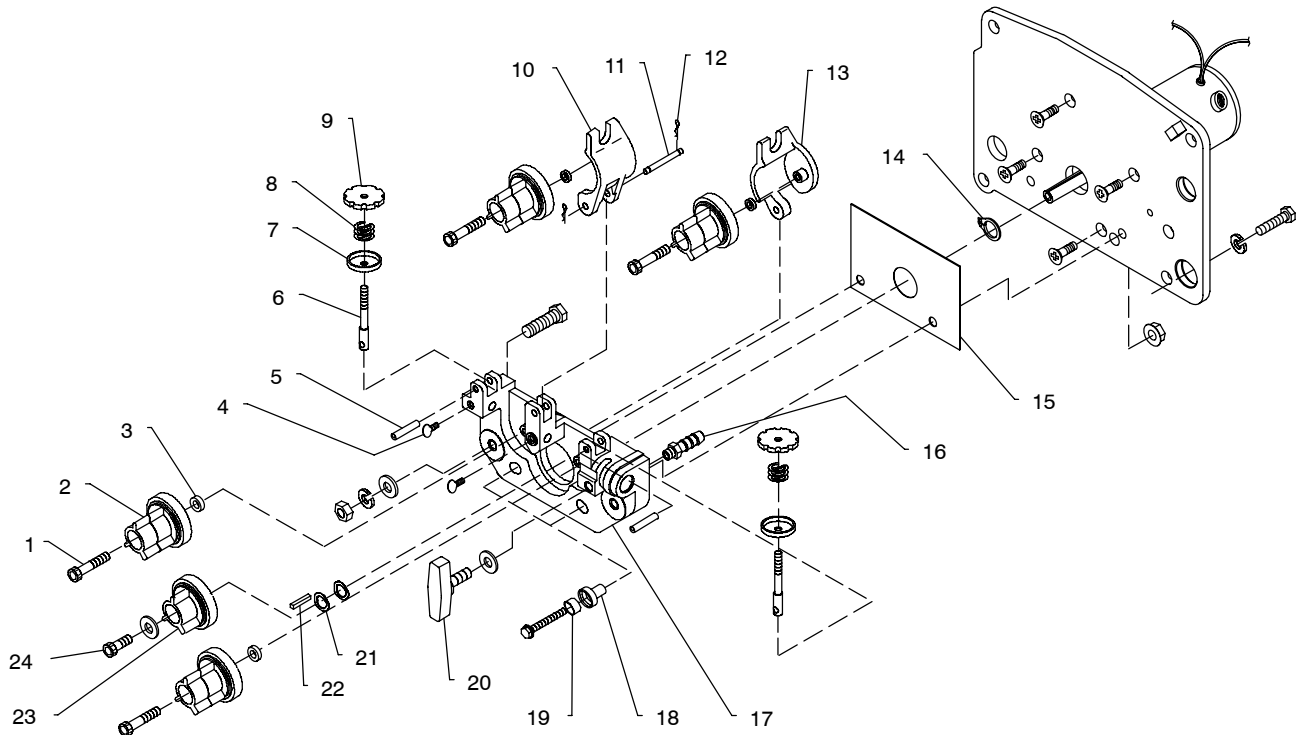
Drive Assembly, Wire (2 Drive Roll)
